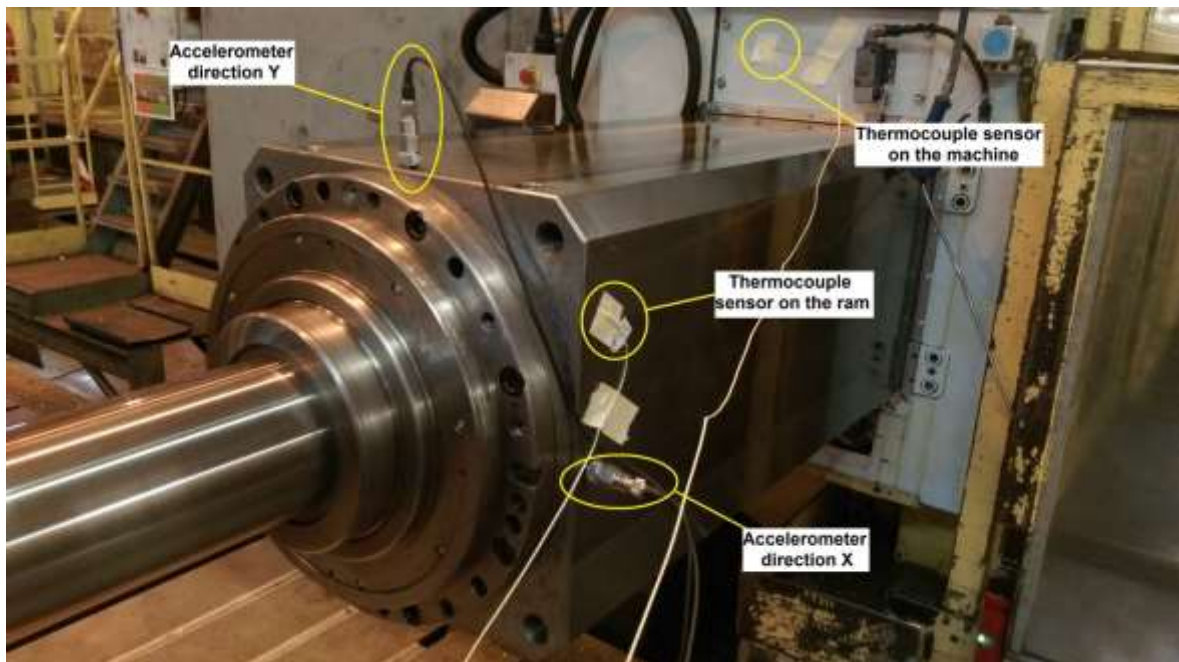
Thermocouple sensors mounted on the spindle and the machine tool.
